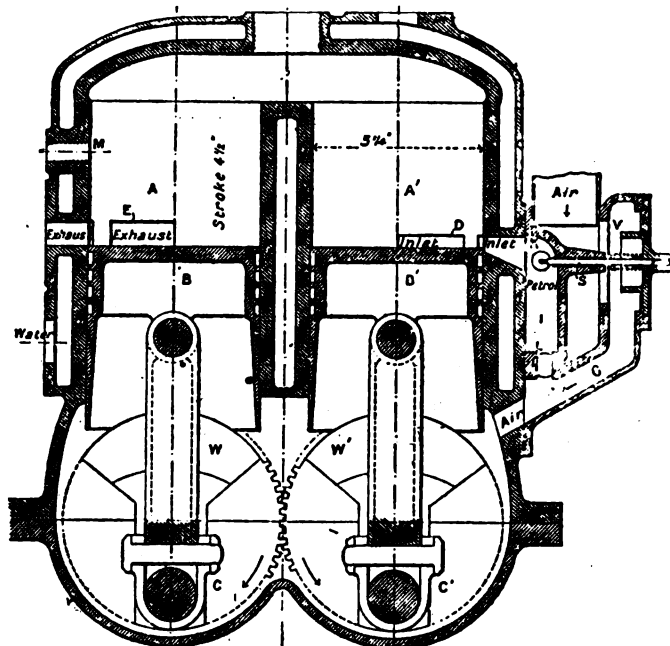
Section of "Valveless" Two-Cycle Engine.
